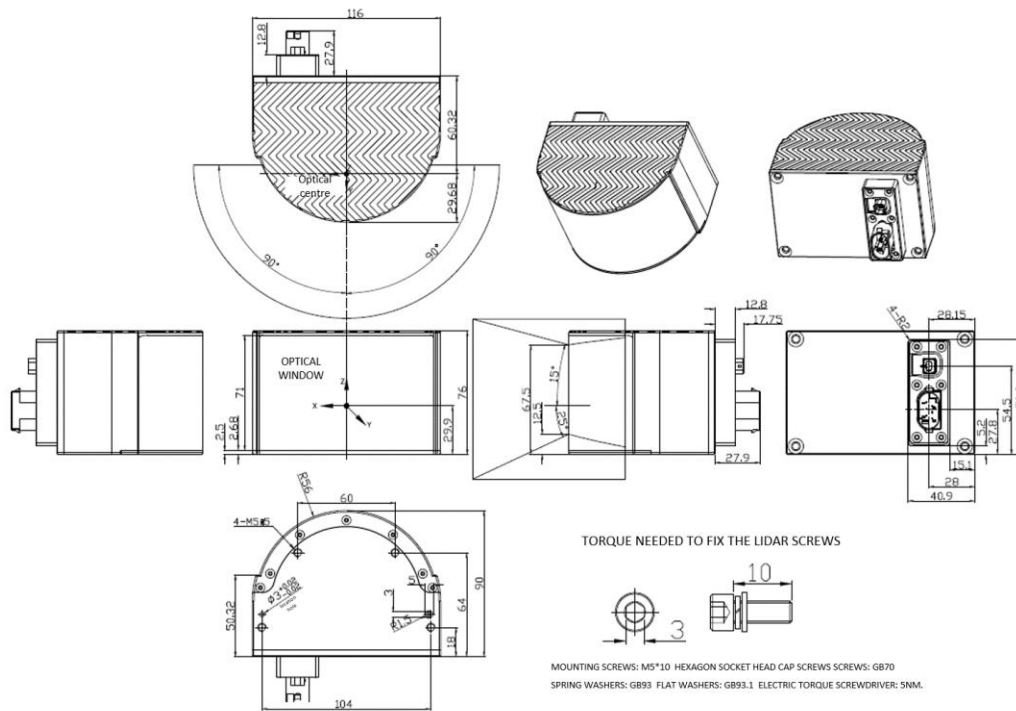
CB64S1 Ultra-Large FOV Lidar Dimensions
